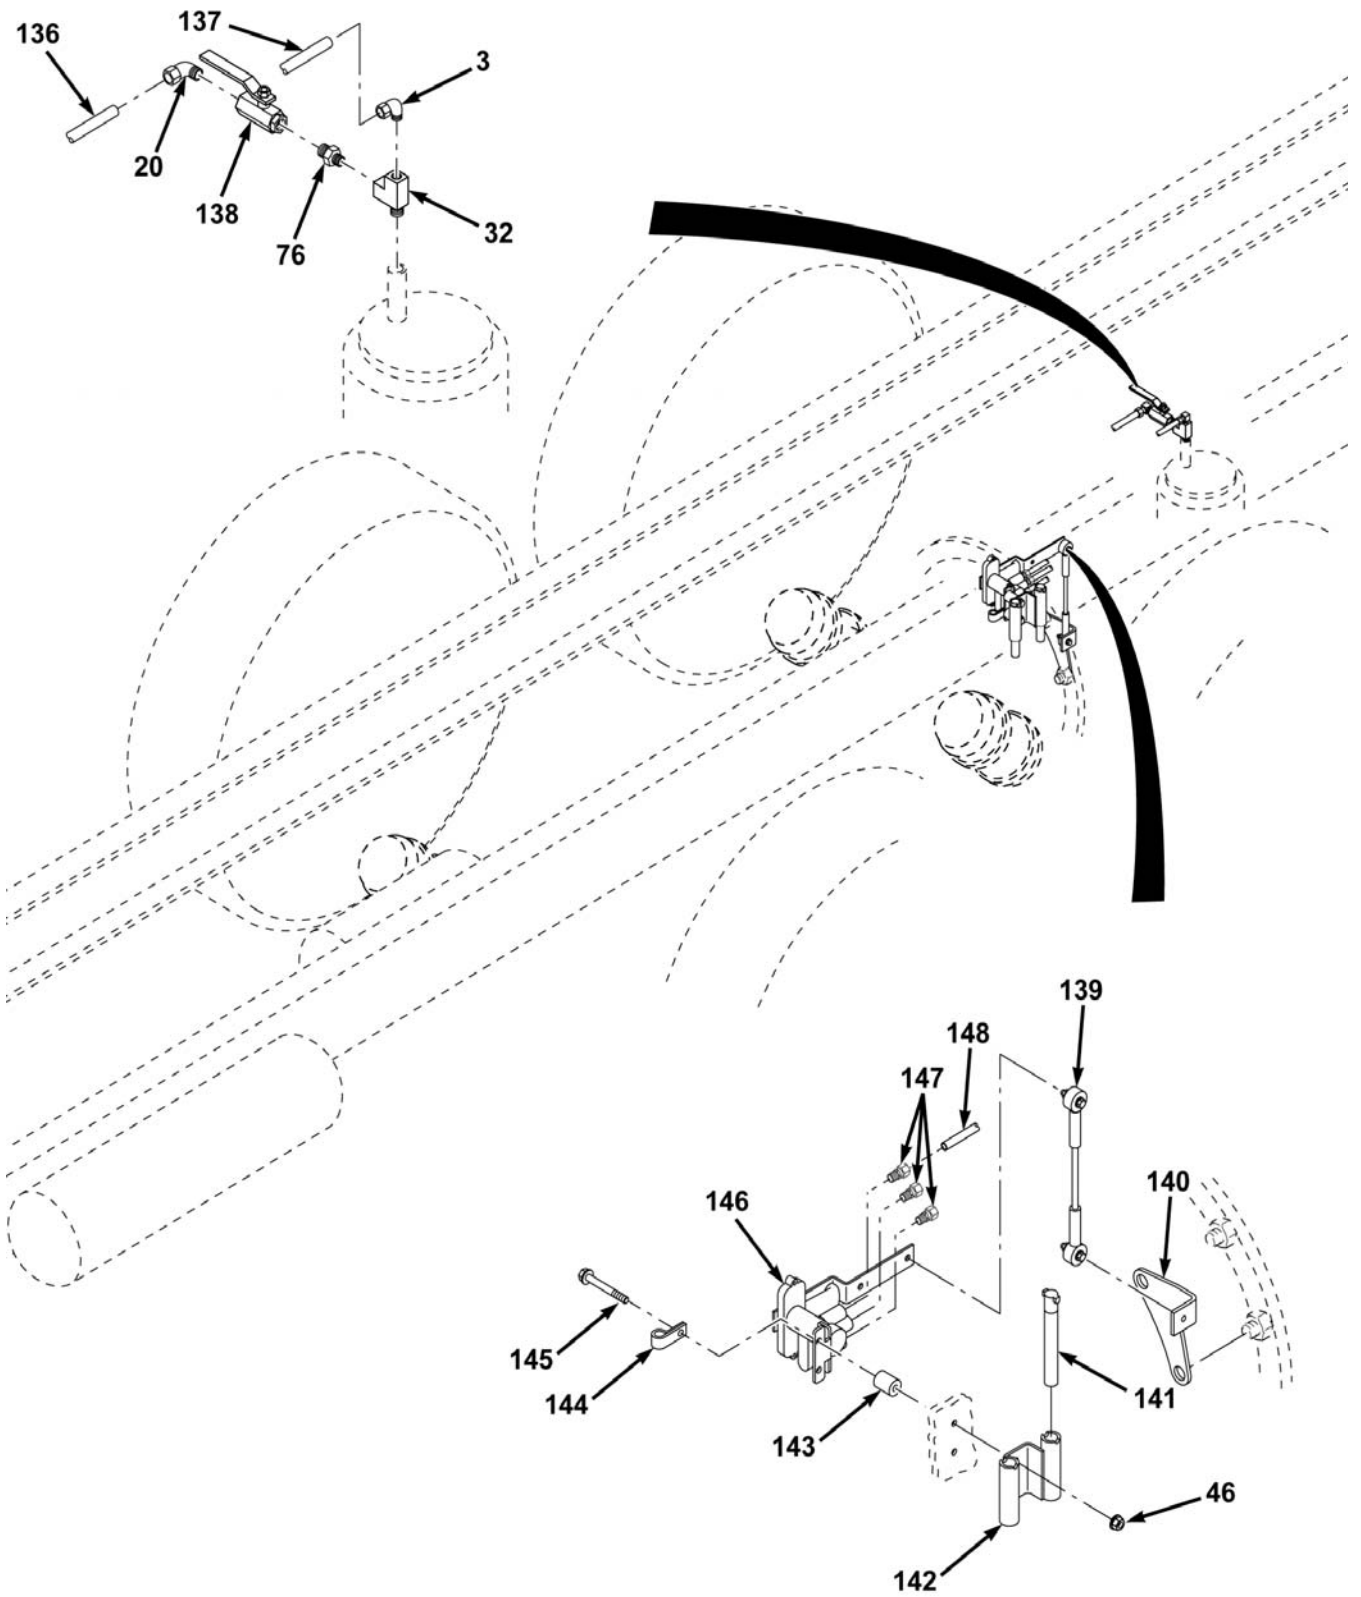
CHASSIS AIR (SHEET 8 OF 15)
